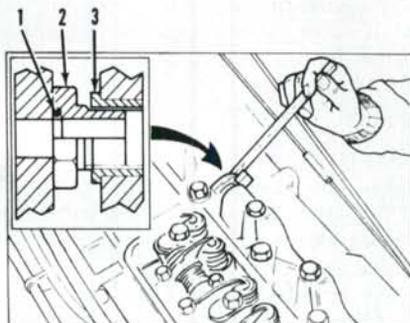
On six-cylinder engines, a connector (2) joins coolant passages between front and rear cylinder heads.
